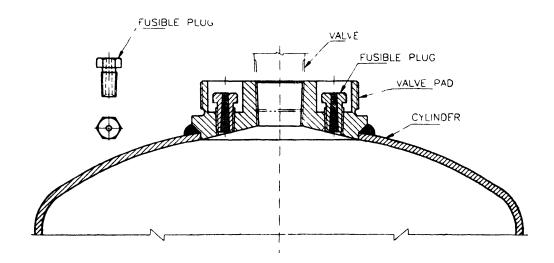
OENERAL ARRANGEMENT SHOWING LOCATION OF FUSIBLE PLUGS ON WELDED CYLINDER
